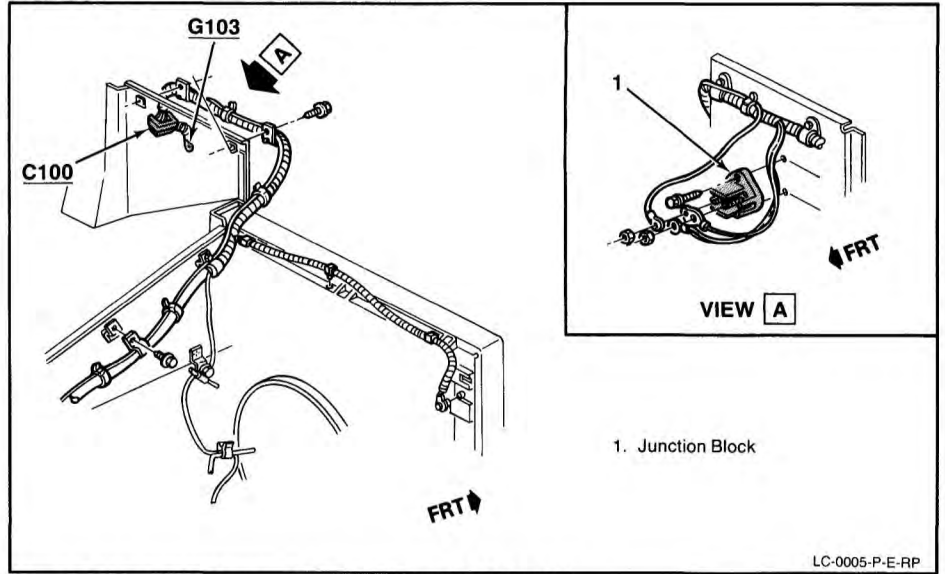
Engine Wiring Harness to Cowl/Radiator (RPO LL4 w/P32)
